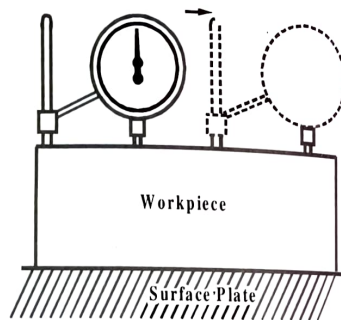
Use of Dial Gauge to Check Parallelism
